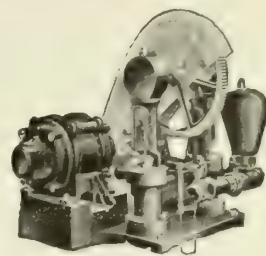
POWER PUMP FOR DIRECT MOTOR DRIVE
